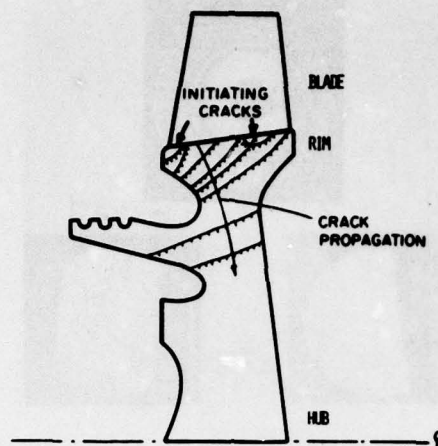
Schematic Cross Section of Turbine Rotor Showing Hub, Rim, and Blade Areas, Indicating Initiating Cracks
